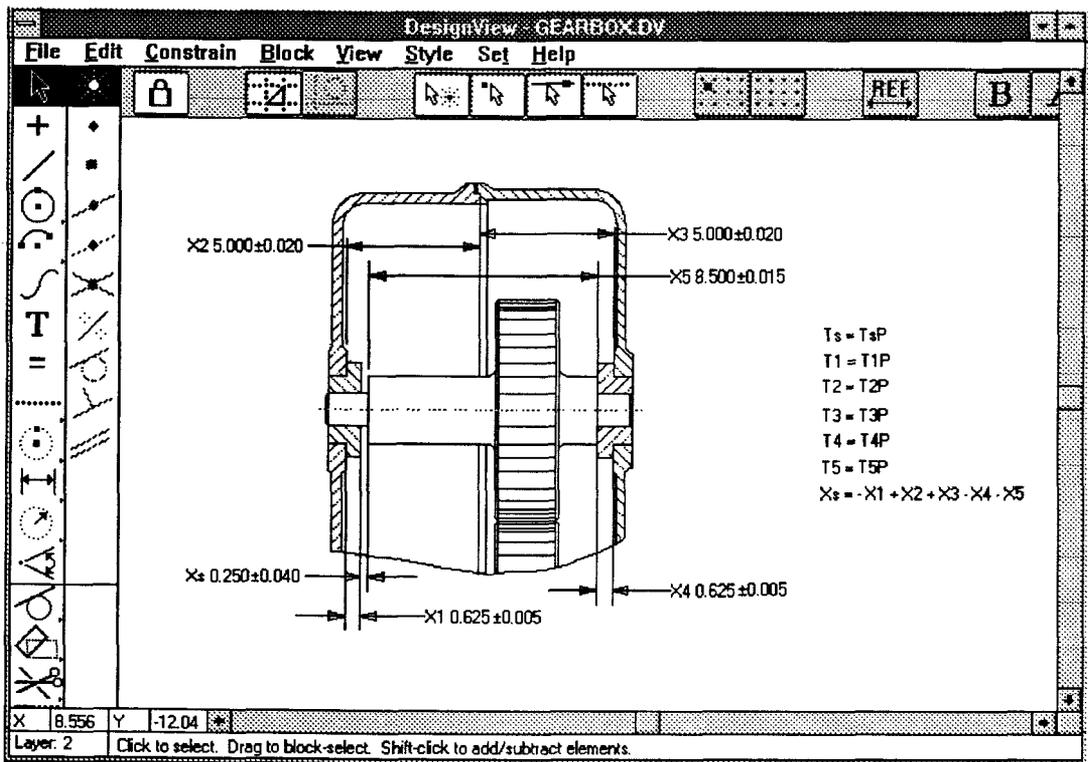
Poke Tolerance Value Back to GEARBOX.DV
